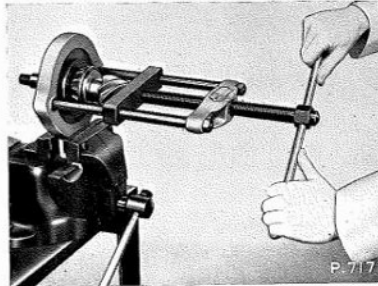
Fitting the bevel pinion inner bearing cone, using the Churchill Tool R.G.4221B and the adaptor set R.G.4221B-22
